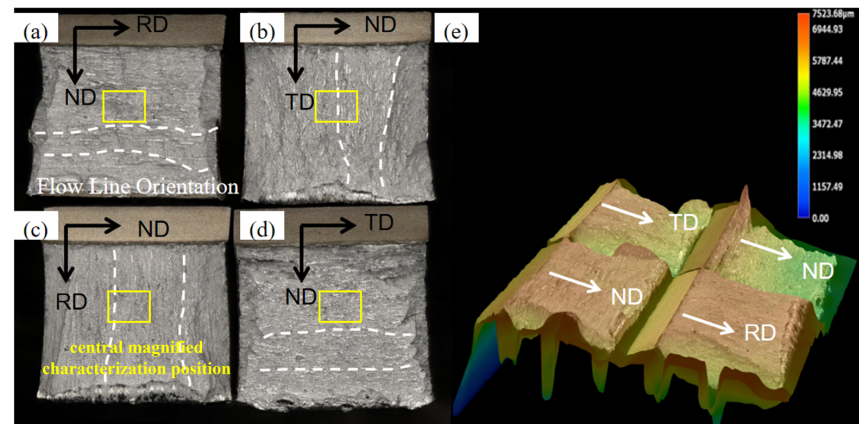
Low-magnification impact fracture morphologies: (a) T-S, (b) L-T, (c) T-L, (d) L-S and (e) fracture surface height difference.
